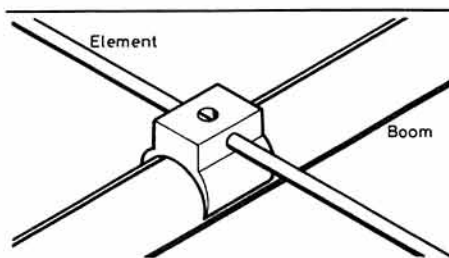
ELEMENT CLIPPED TO BOOM SHOWING HOW THE WELDING ROD IS SIMPLY PUSHED THROUGH A HOLE DRILLED IN THE CLIP
